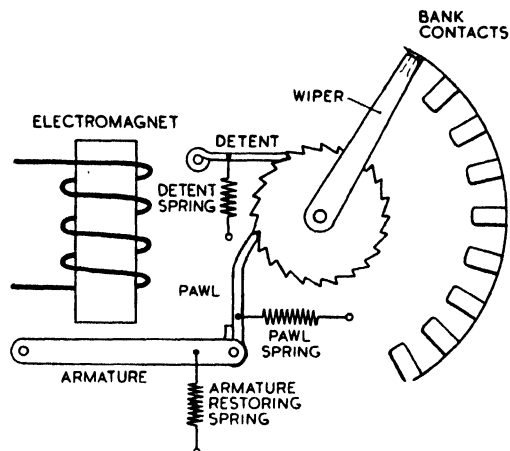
FORWARD-ACTING RATCHET AND PAWL DRIVE
